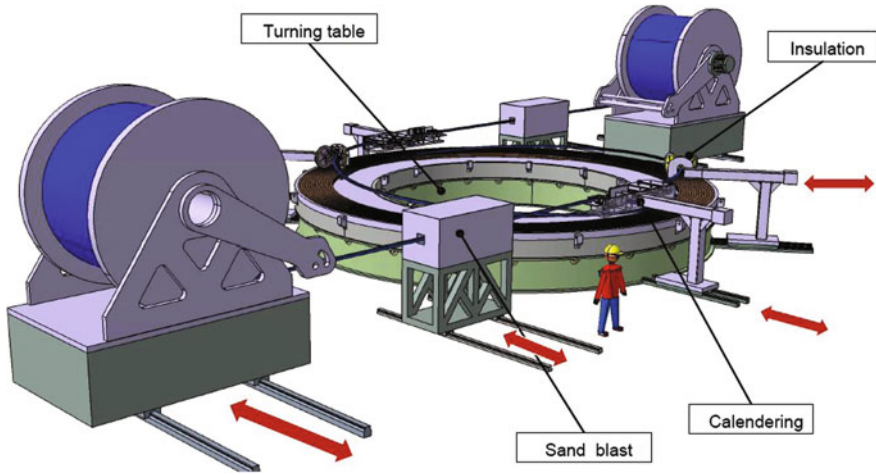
The ITER PF coil winding machine. Courtesy of ITER Organization
